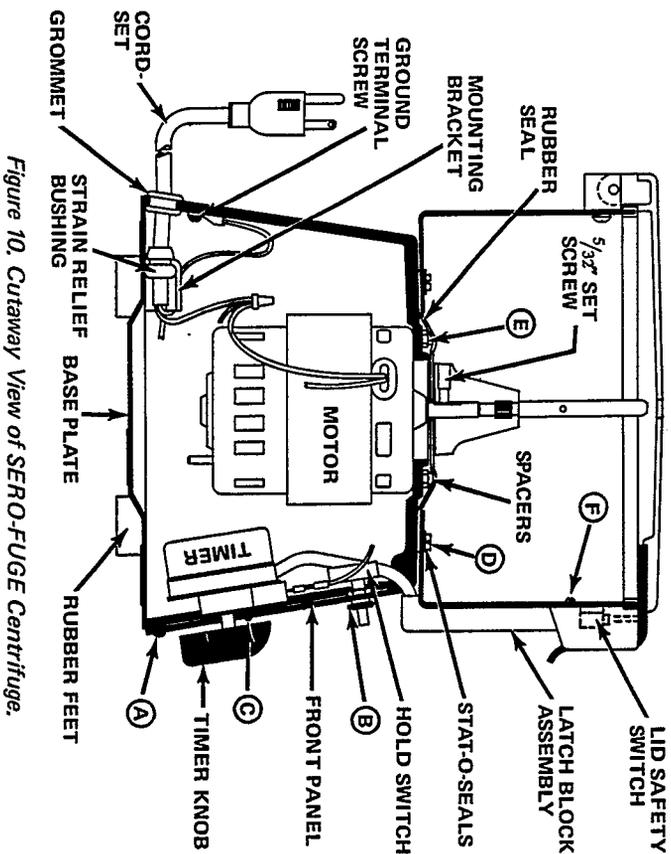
Cutaway View of SERO-FUGE Centrifuge.
